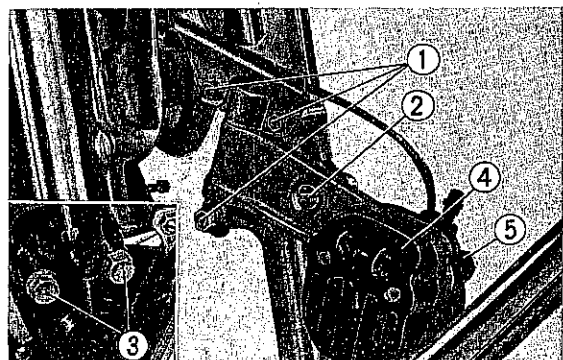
① Caliper mounting bolts ④ Caliper B
